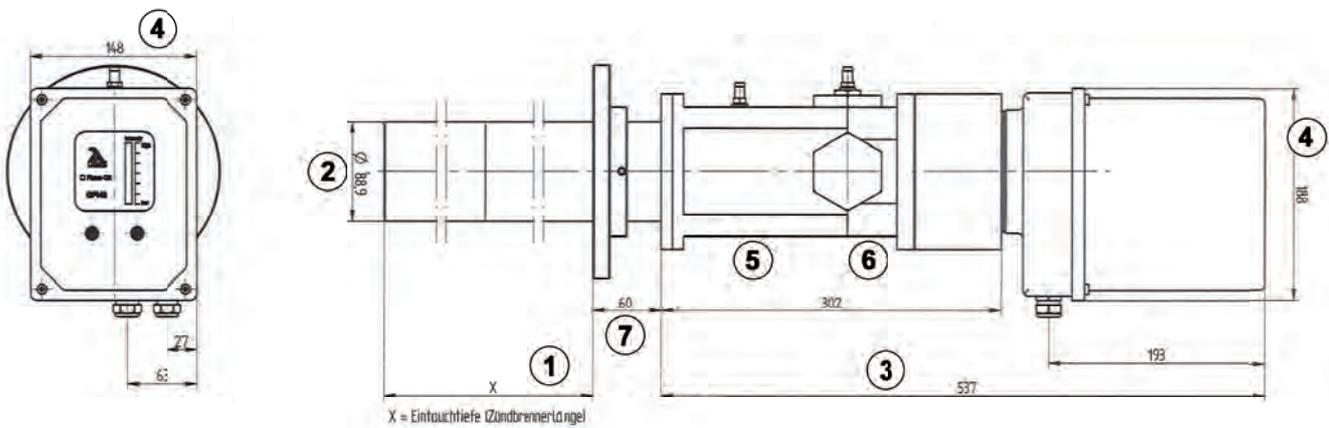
Dimensions of GF189 pilot burner design A/B
